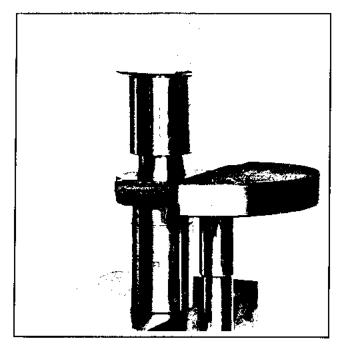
E-71. Pressing Crank Pin into Transmission Side Crankshaft (1963-1976)
